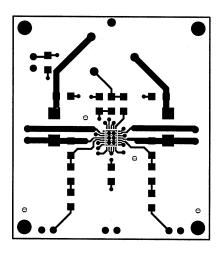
Recommended IVG PC board layout: Component-side layout
